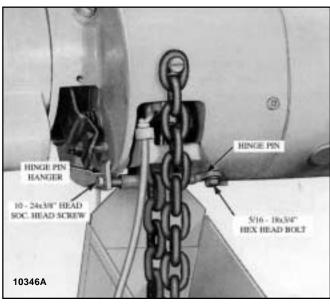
Hinge Pin and Hanger Installation (Pull Cord Model Shown)
